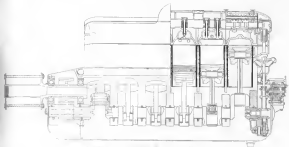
DISASSEMBLED CROSS-SECTION, SIDE VIEW
